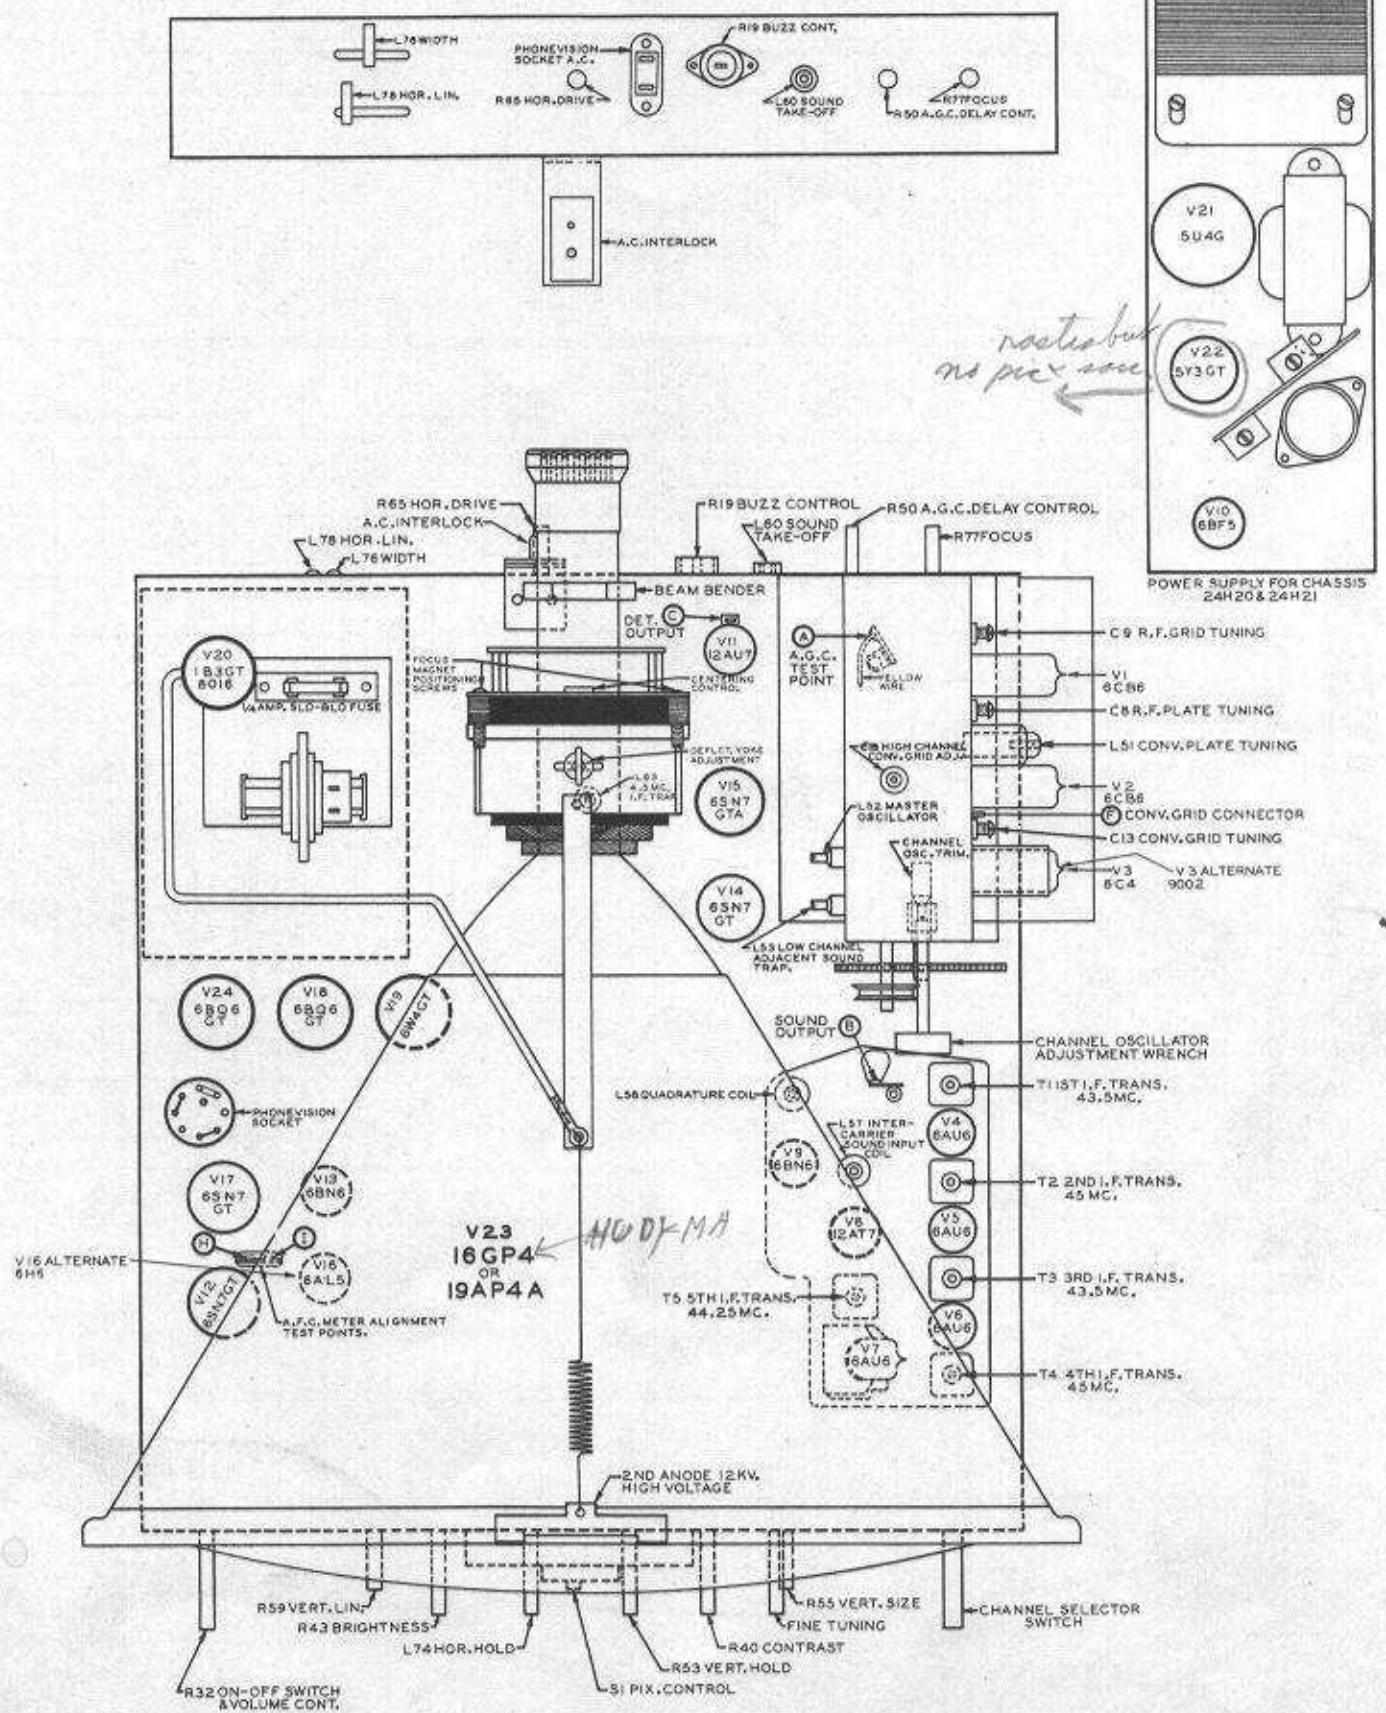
Tube and Trimmer Layout 24H20-21 Chassis.
